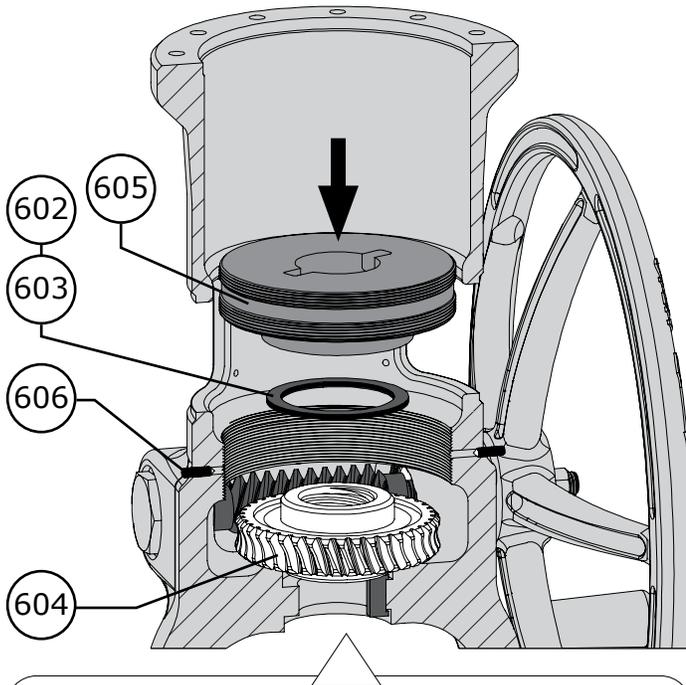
Bearing Retainer Flange Installation - Steps 9 & 10
